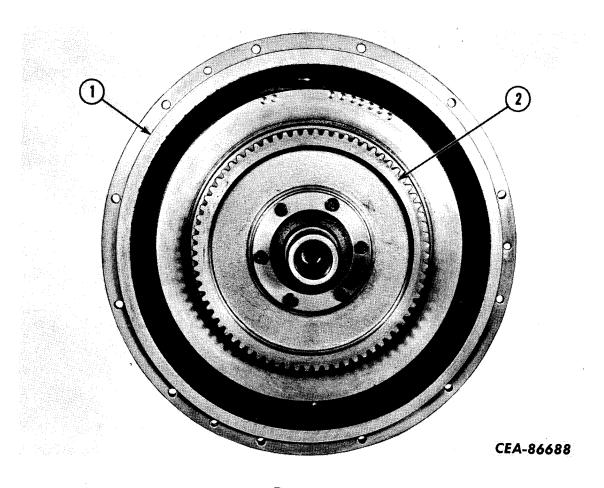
Torque Converter and Accessory Drive - Rear View.
